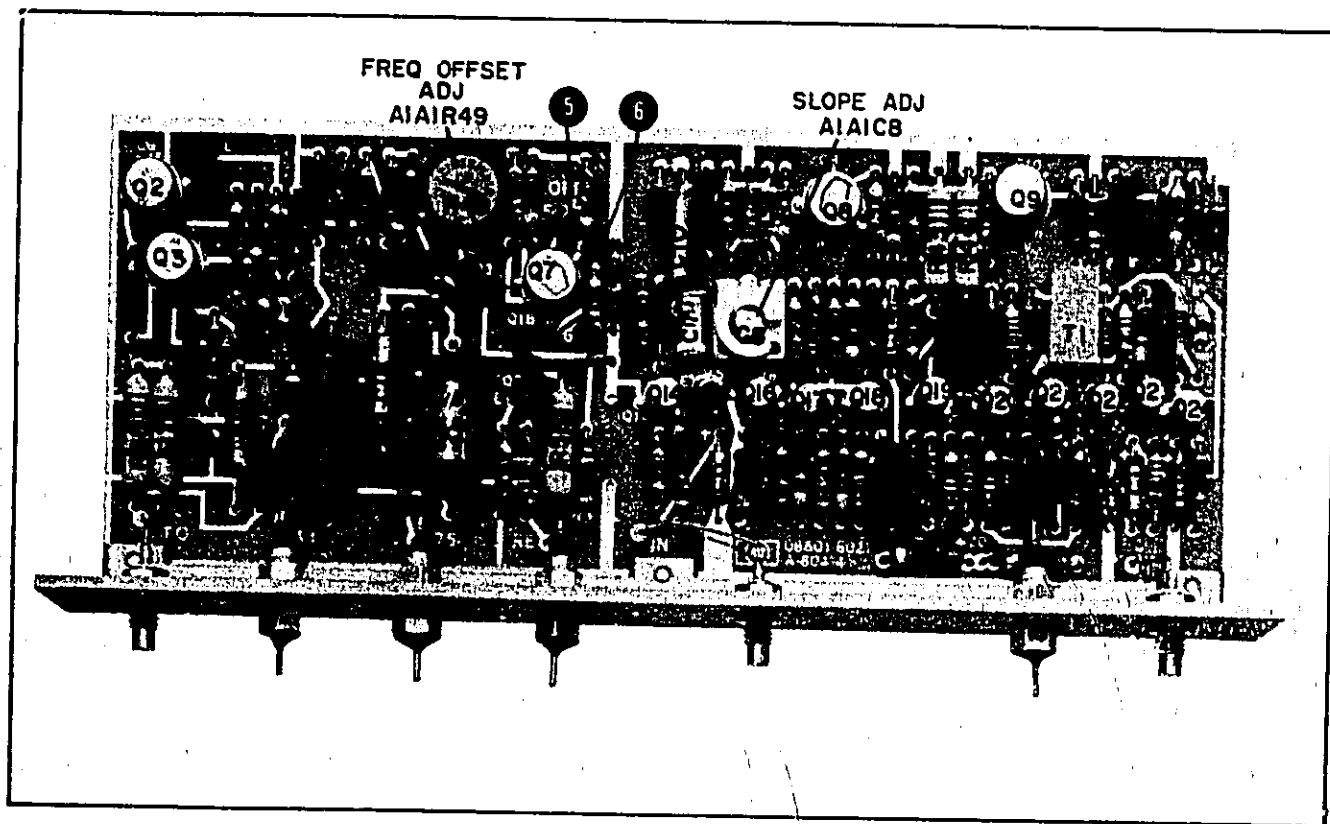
Component Identification, A1A1 Discriminator Assembly
